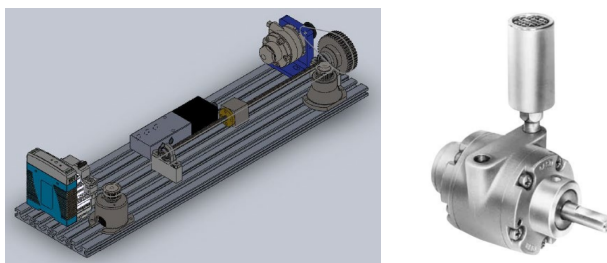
a) CAD model of the pneumatic spindle drive mechanism with ball screw, b) GAST pneumatic motor (model 1AM-NRV-63A).
